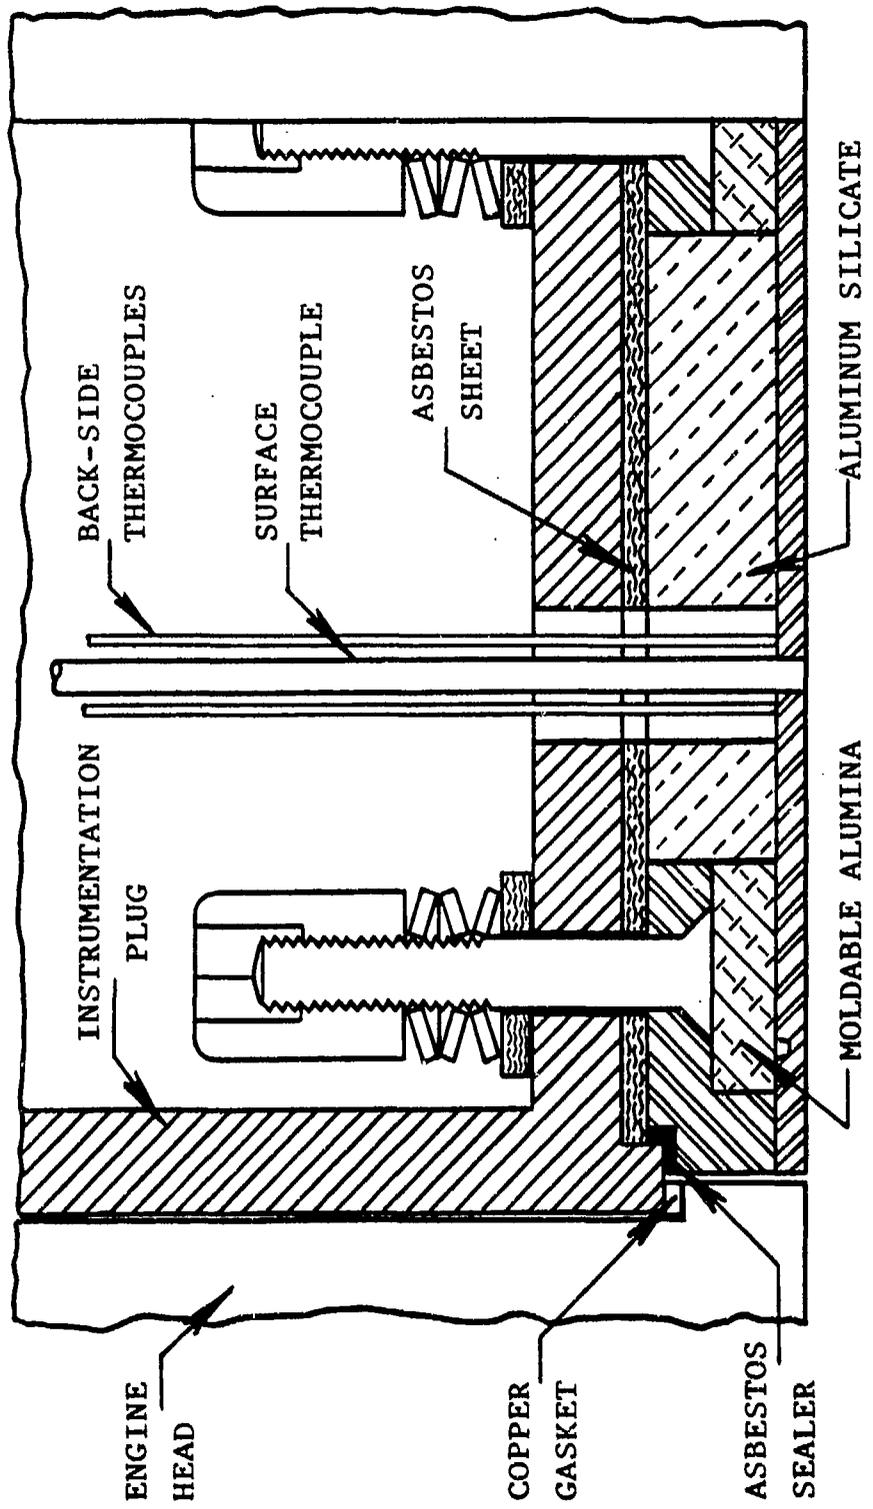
Insulated Instrumentation Plug Assembly with Metal Plate
